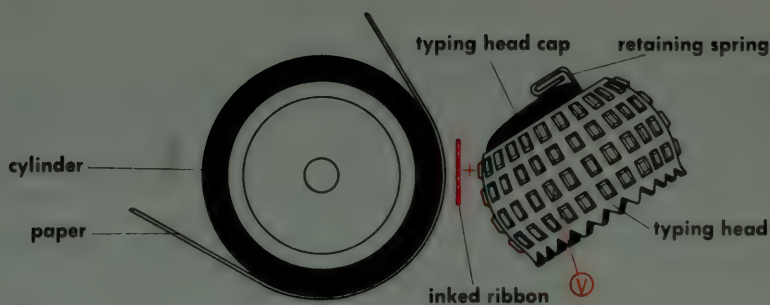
TYPING HEAD AND CYLINDER (side view)
